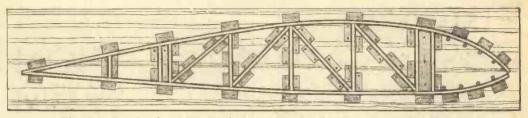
Details of a wing rib jig, using wooden blocks and eccentric buttons.
